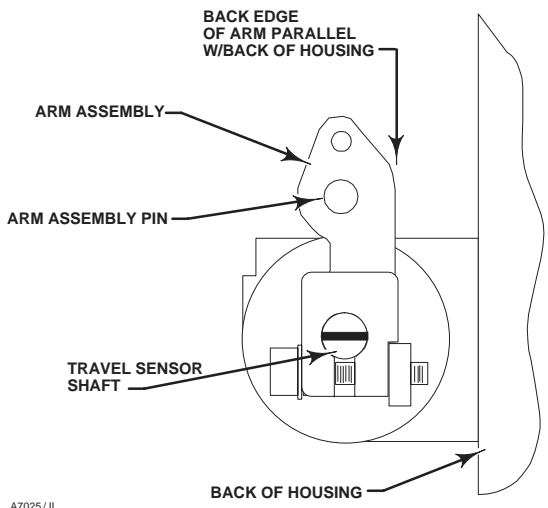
Type DVC5020 Travel Sensor Arm/Housing Back Plane Alignment
